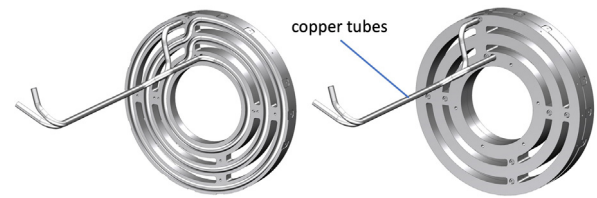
Copper tubing lines brazed to the copper cold plate (left) and the fully assembled cold plate (right).
